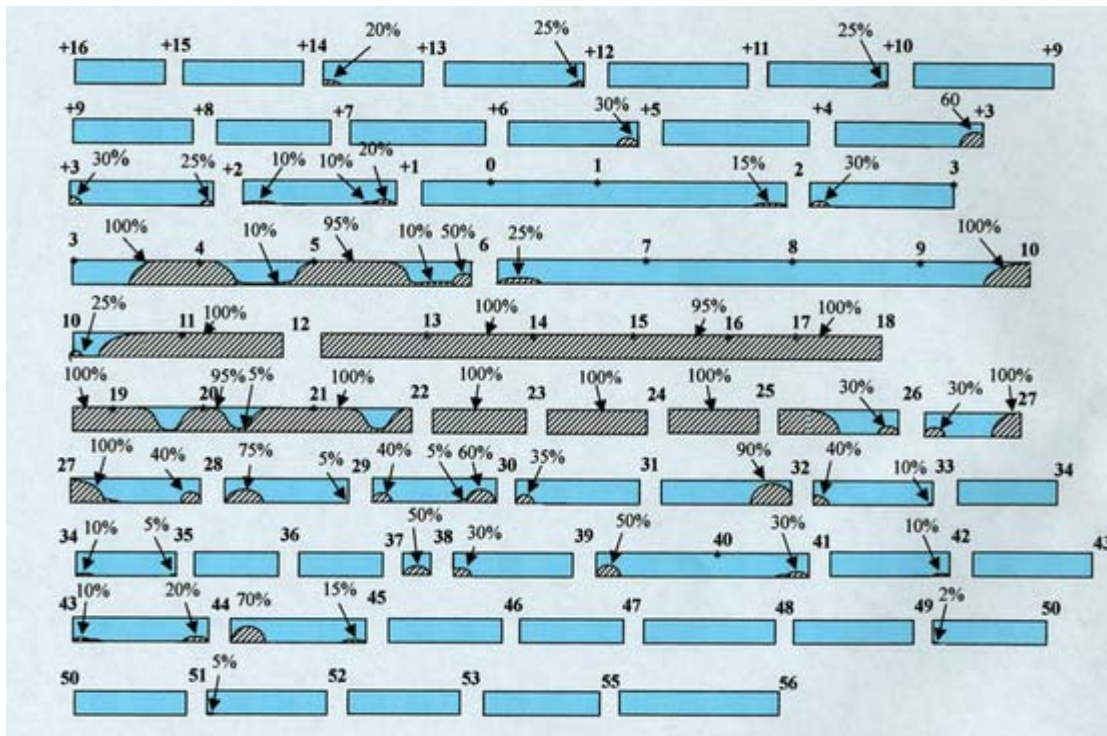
A drawing (not to scale) indicating the fatigue cracking on the skin fracture surface from rivets +16 through 56.
